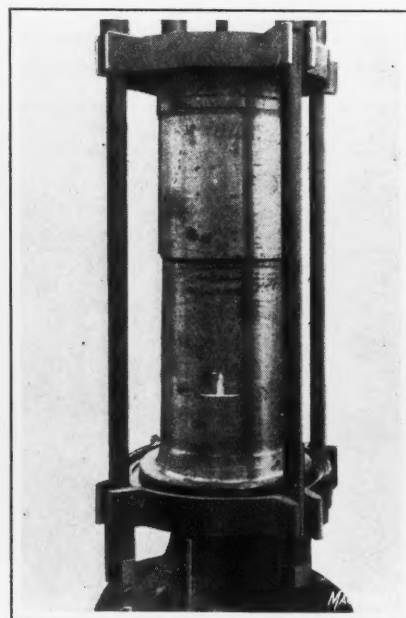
Testing Liner for Leakage in a Hydraulic Press
